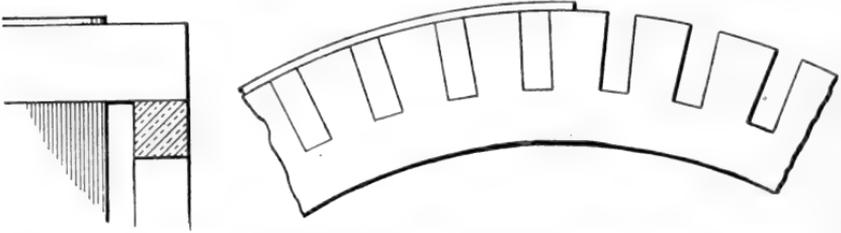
Typical methods of fastening end Rings to rectangular Rotor Bars.
